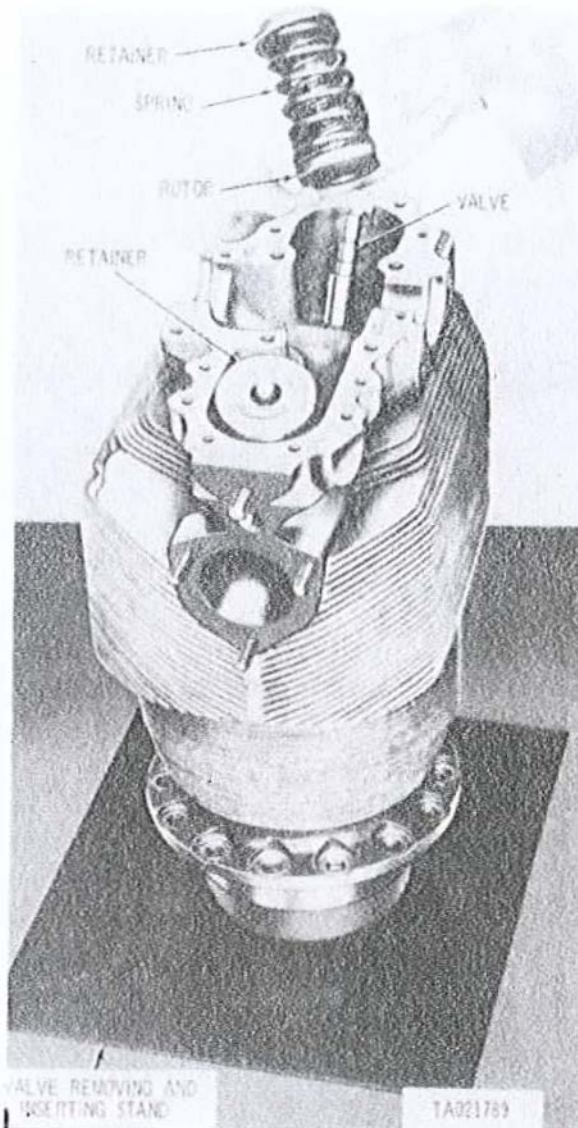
Removing or installing valve springs, upper retainers, and exhaust valve rotor.
